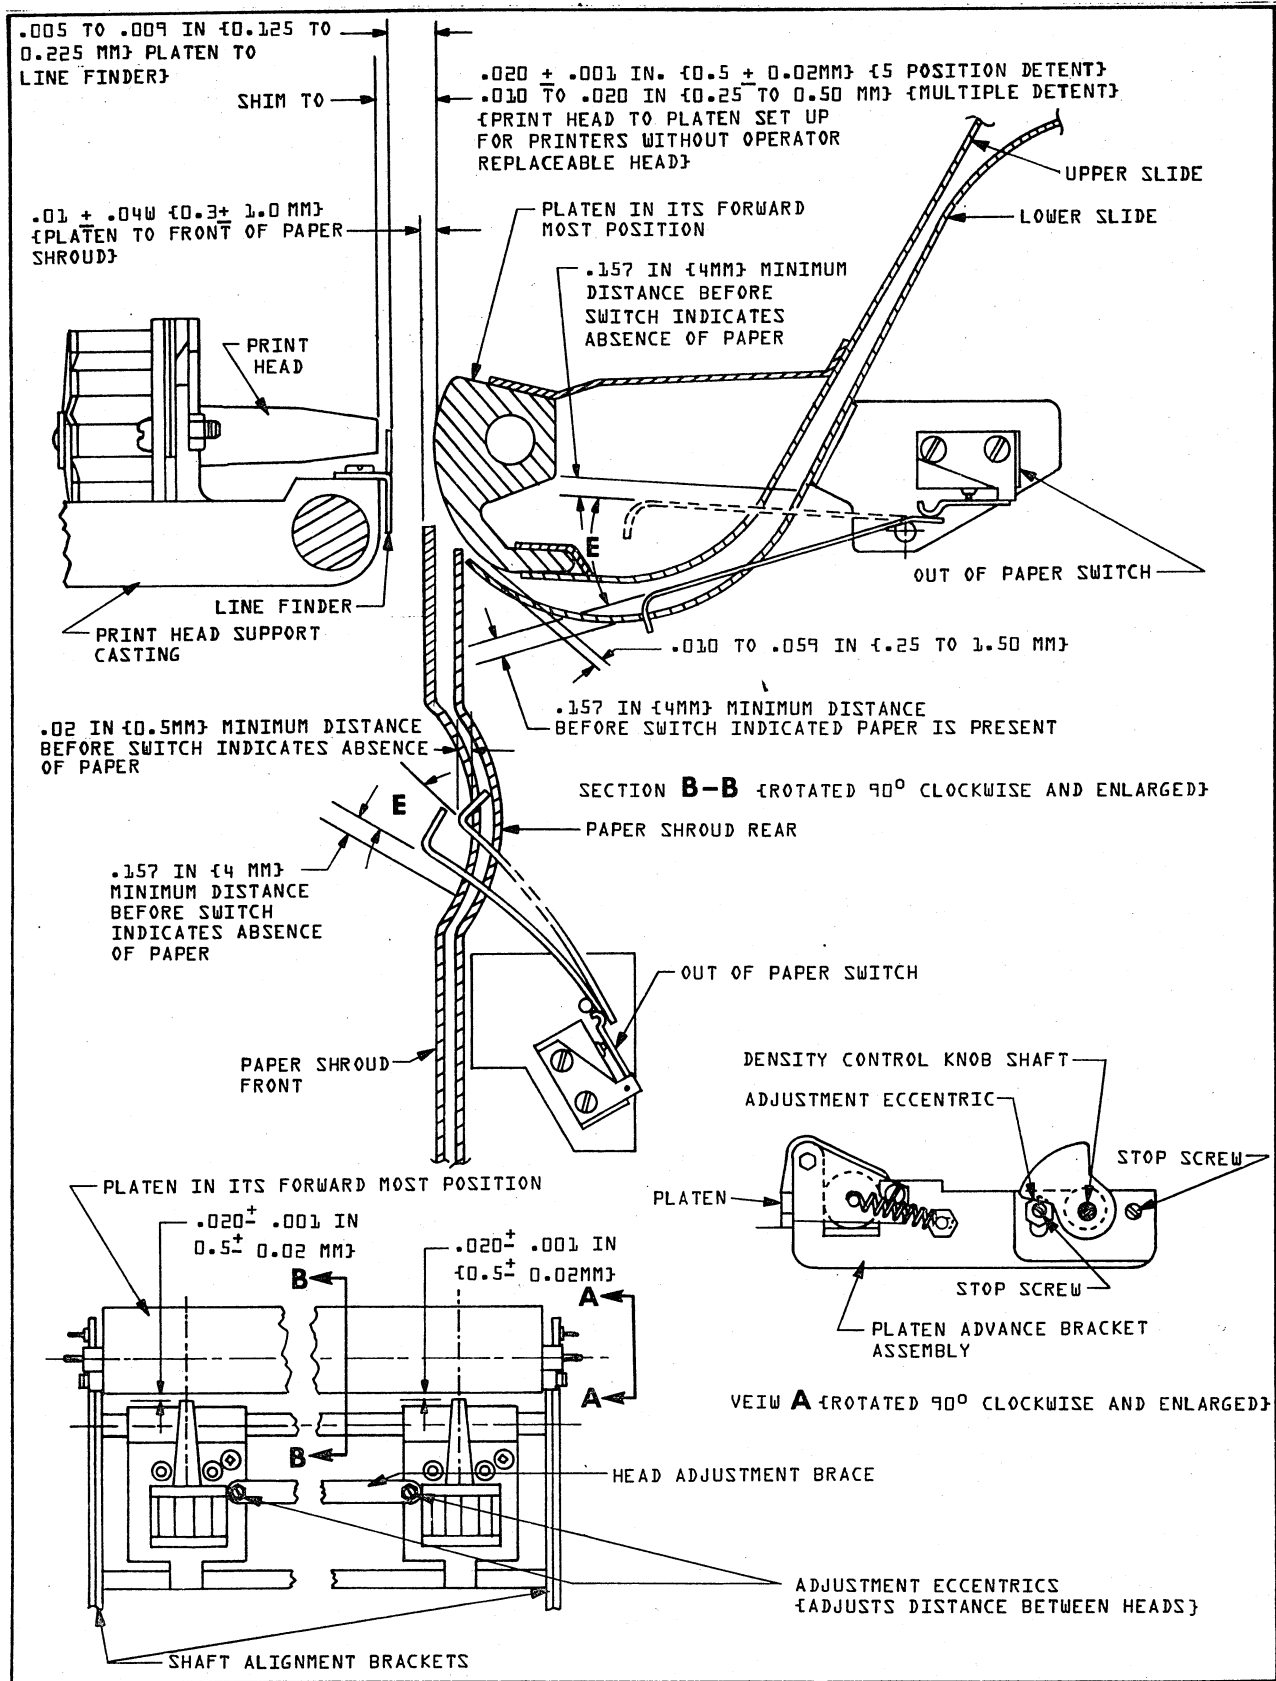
PRINT HEAD, PLATEN, LINE FINDER, PAPER SLIDE AND OUT OF PAPER SWITCH ADJUSTMENTS.
